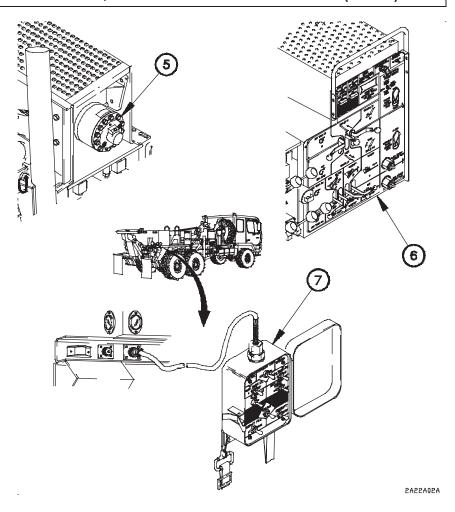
Material Handling Crane (MHC), 30K Winches, and Underlift Assembly (Cont)
